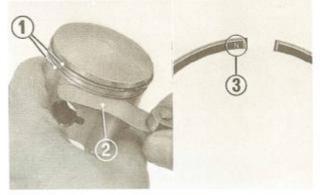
(1) Piston rings (2) Feeler gauge
